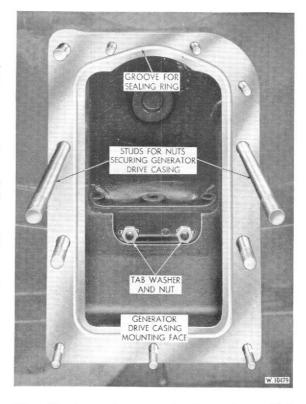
Internal nuts and tab washers which secure the top wheelcase to the air-intake.
